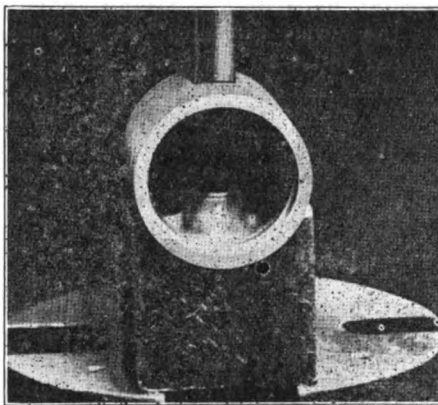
PRESSING OUT THE WRIST PIN BUSHING WITHOUT DANGER OF SPRINGING THE PISTON OUT OF ROUND
